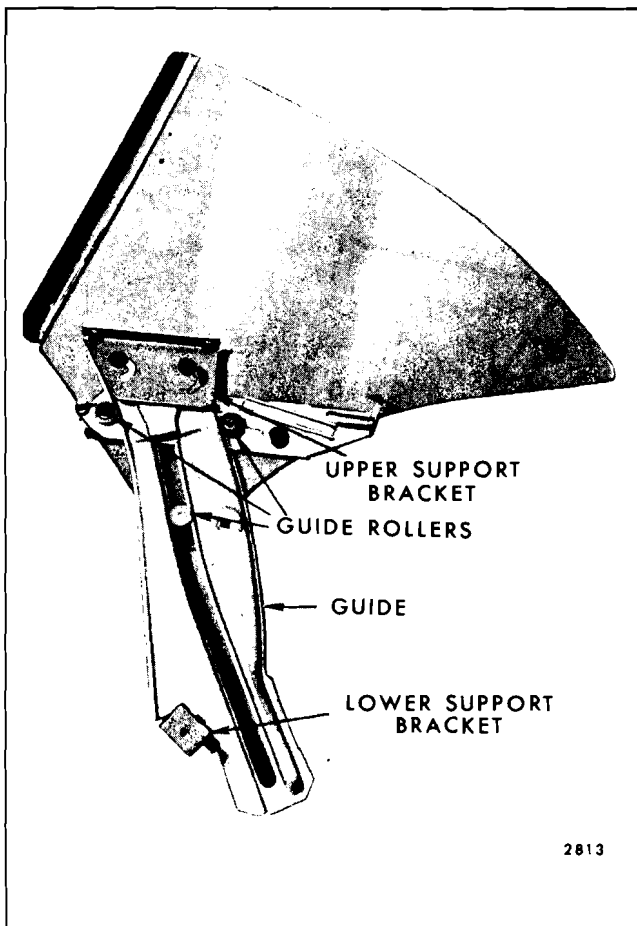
Rear Quarter Window and Guide Assembly - "A-37, 67, 87" Styles
